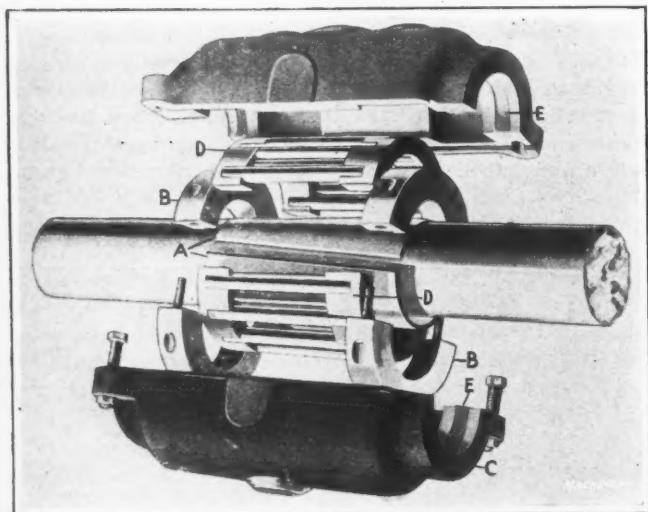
Close View illustrating Details of Roller Bearing shown in Fig. 5
